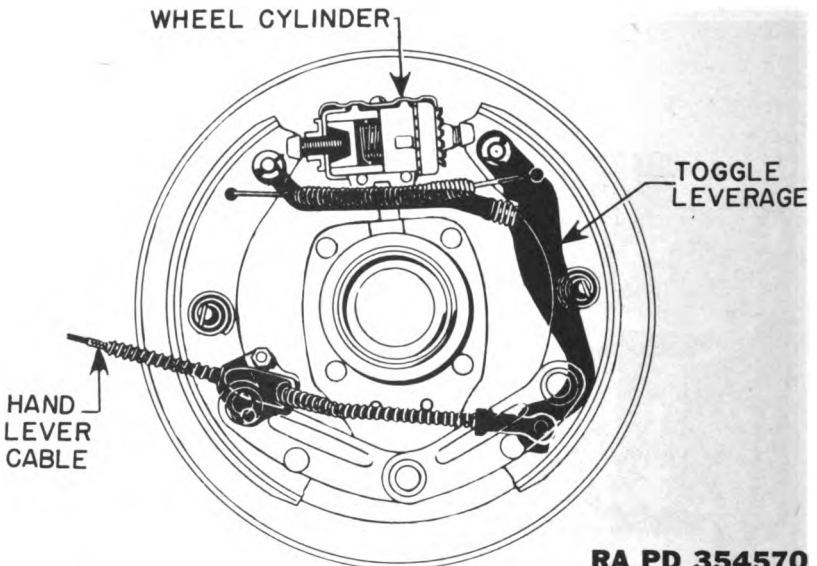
Hand Brake Linkage on Hydraulically Operated Brake.
